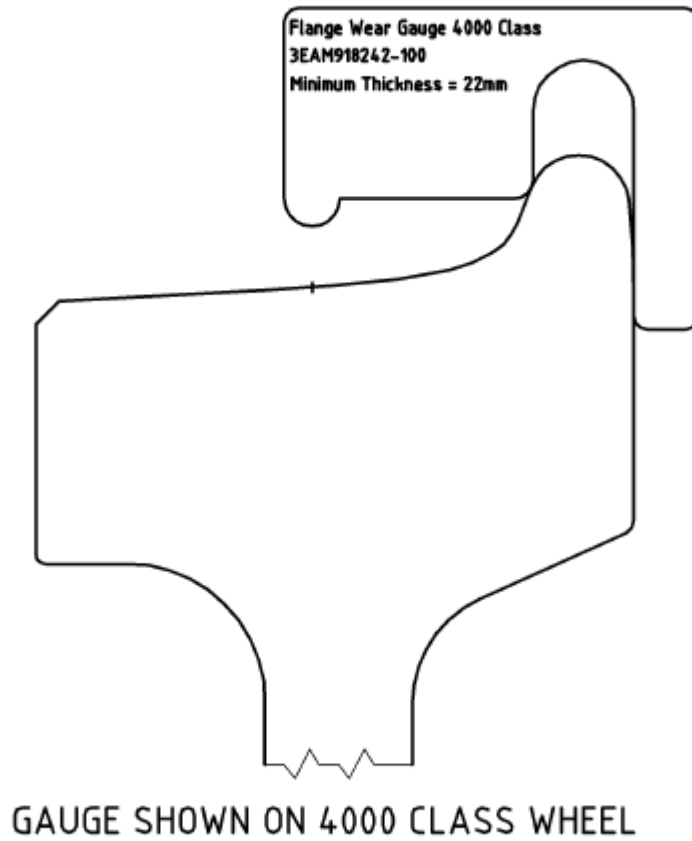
Wheel Condemn Gauge - thin flange indication (4000 Class only)
